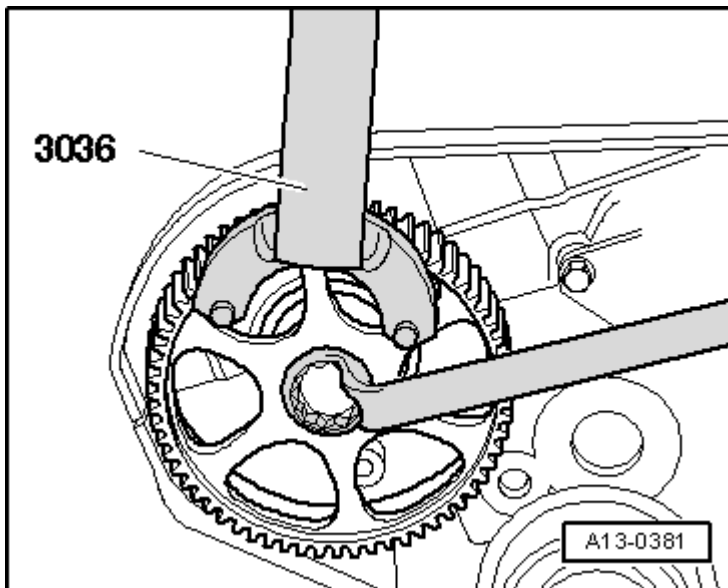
Identifying Use Of Counterhold On Camshaft Gear Using 3036 Retainer
